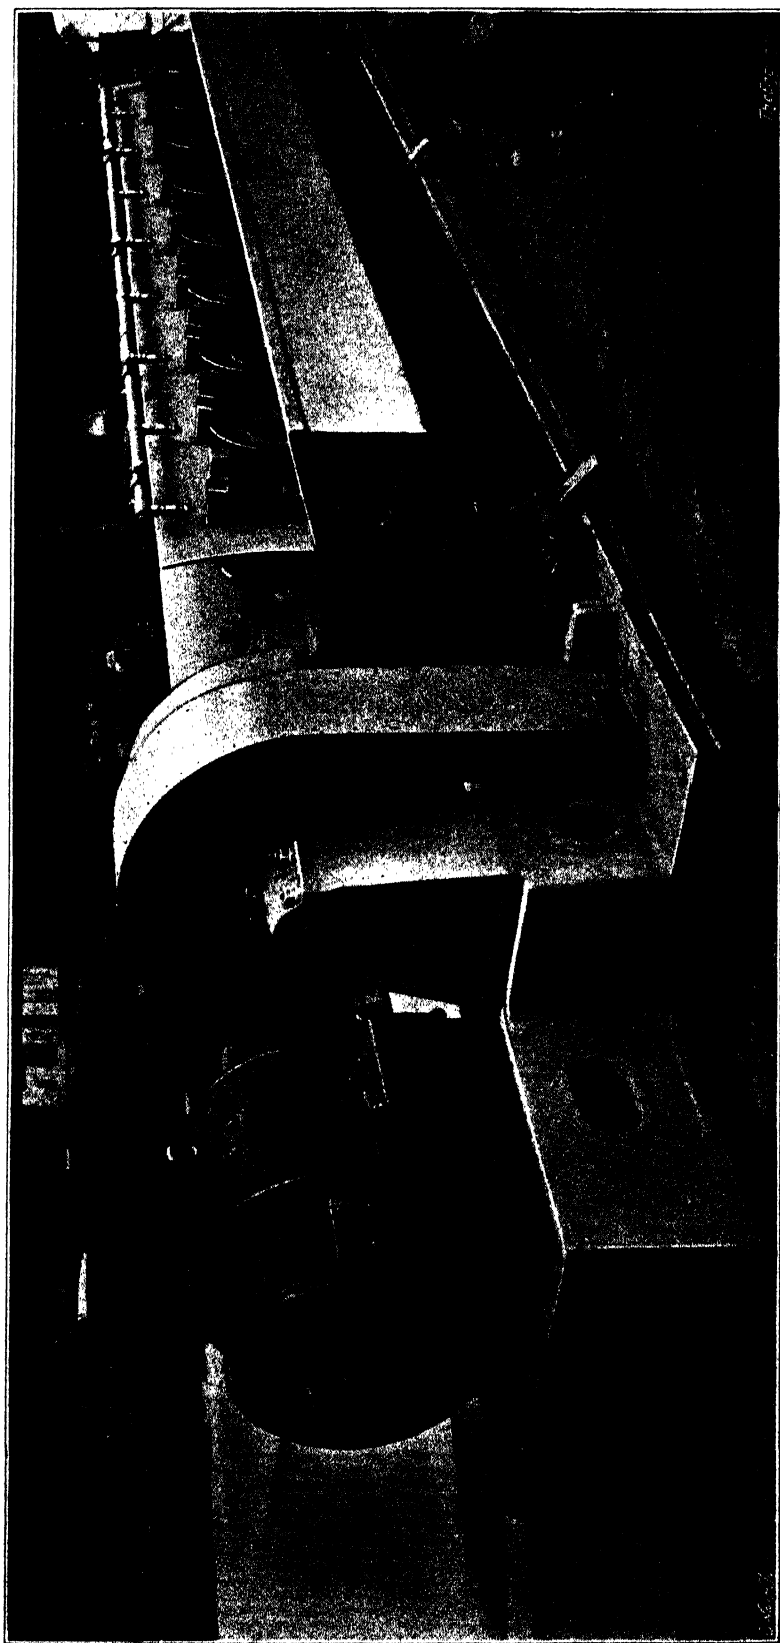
NINE-HOLE CONTINUOUS WIRE-DRAWING MACHINE—W. H. A. ROBERTSON.
